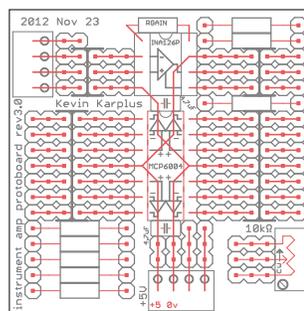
A drawing of the protoboard, showing the printed-circuit-board layers. The red line is a copper *trace* on the top (component side) of the printed-circuit board, while the blue lines are copper traces on the bottom (solder side) of the PC board. The grey lines are silkscreen printing on the top surface of the board. (One can do silkscreen printing on the solder side also, but this board has none.)
